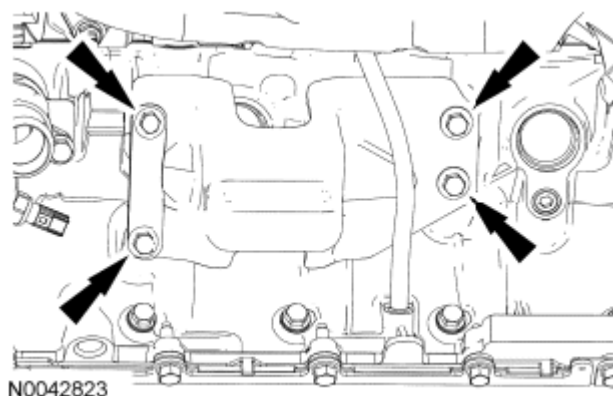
Locating LH Engine Support Insulator Bracket And Bolts
